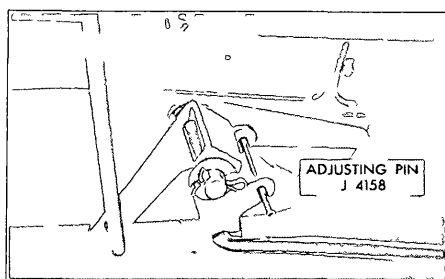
Adjusting pin installed in lower throttle valve bell crank
